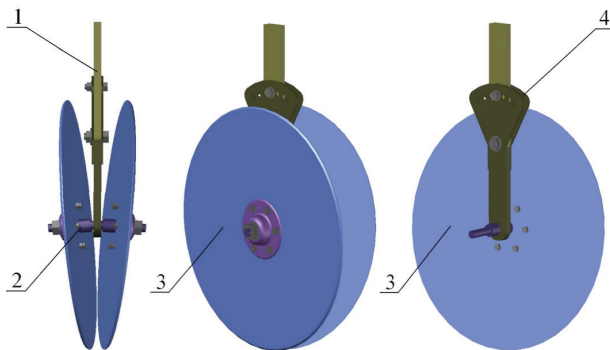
Improved conceptual design of the double disc coulters: 1 – riser (body); 2 – axle; 3 – disc with hub and rolling element; 4 – adjustment bracket
